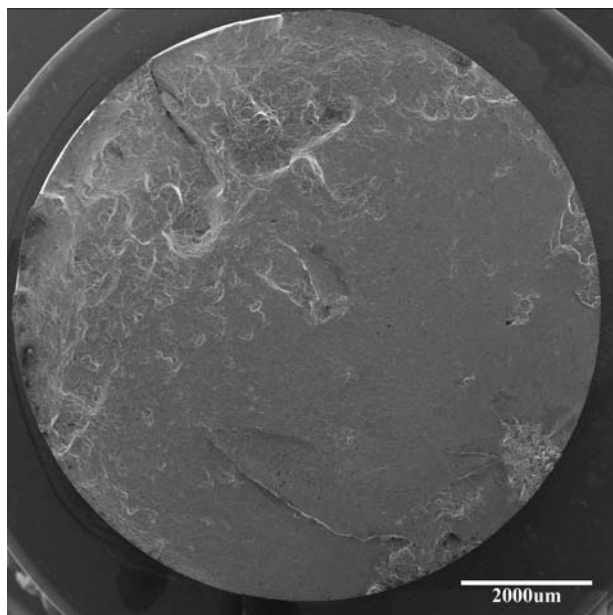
Macroscopic View of a Straight Cylinder Specimen Fracture Surface, $S_a = 147$ MPa (Specimen G4)
